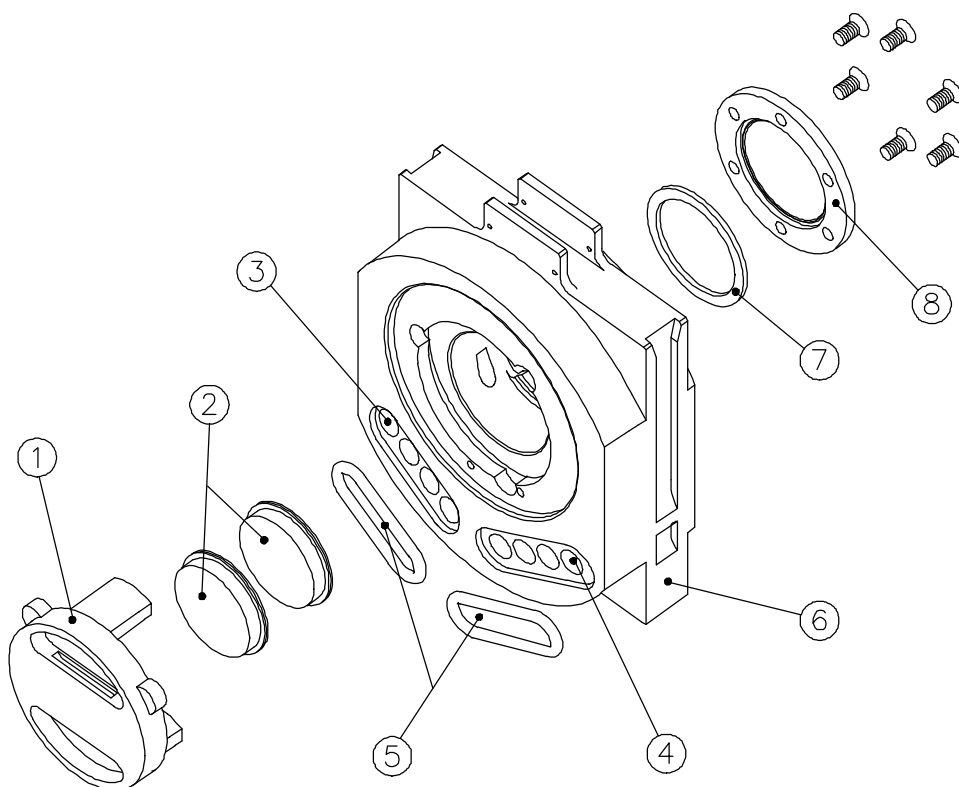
Exploded view of a VBTS target holder, showing (1) the beam stop, (2) tandem stainless steel or Nb-encapsulated solid targets, (3) cooling water inlet ports, (4) cooling water outlet ports, (5) disposable rubber water seals, (6) target holder body, (7) Cu sealing ring, and (8) beam entrance window.
